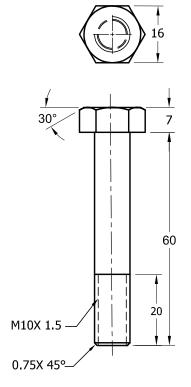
Orthographic views and dimensions of the M10X 1.5 bolt
